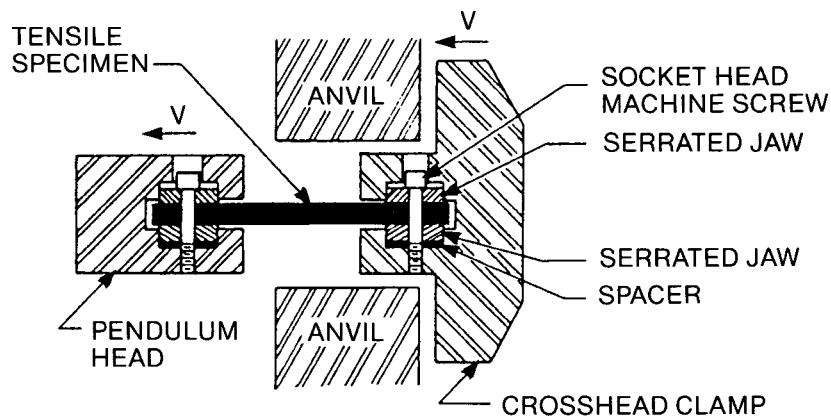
Specimen-in-Head Tension-Impact Machine (Schematic)
